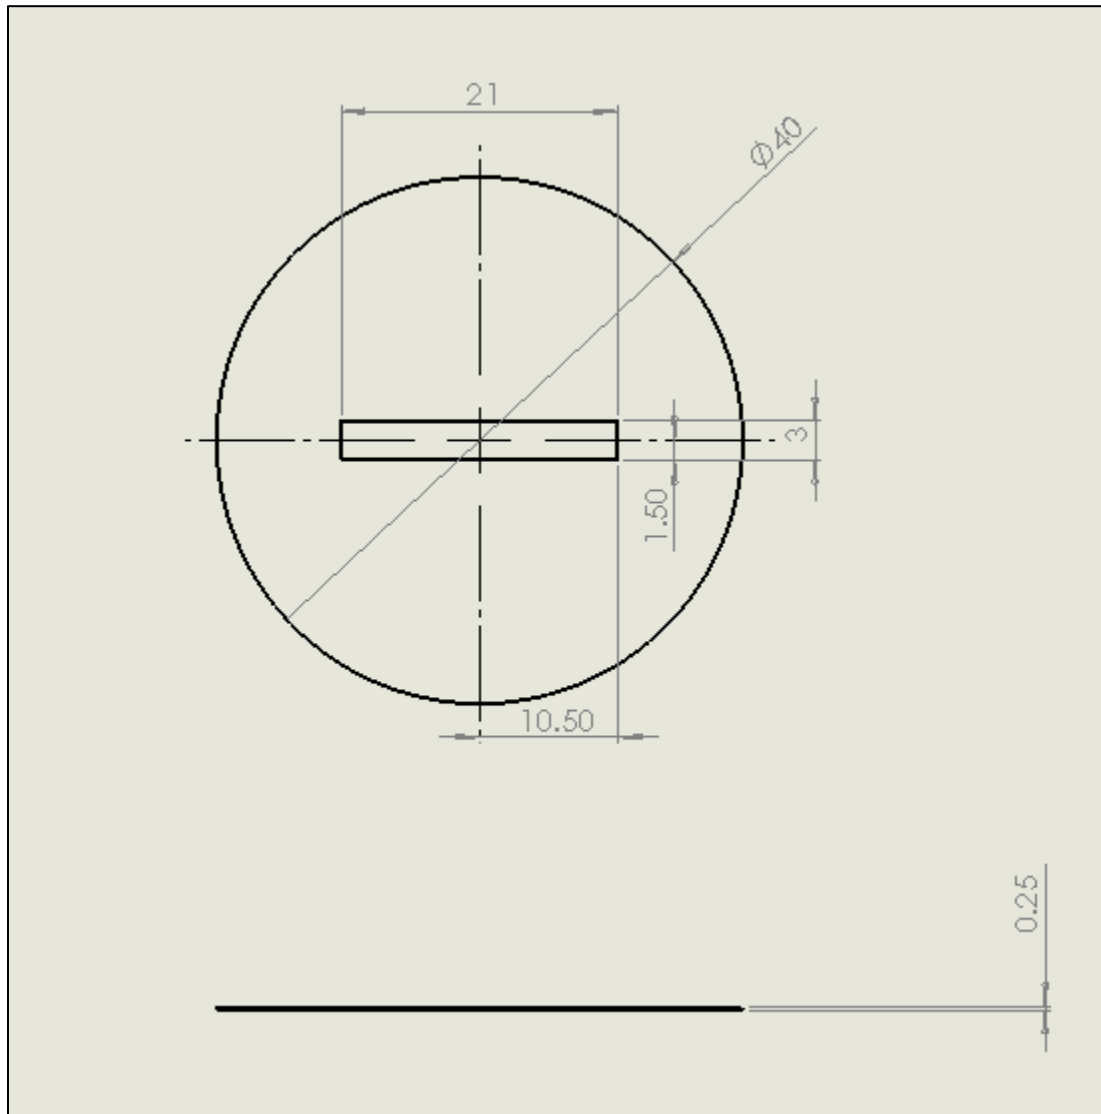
Engineering drawing of laser cut top gasket with dimensions of cut displayed
